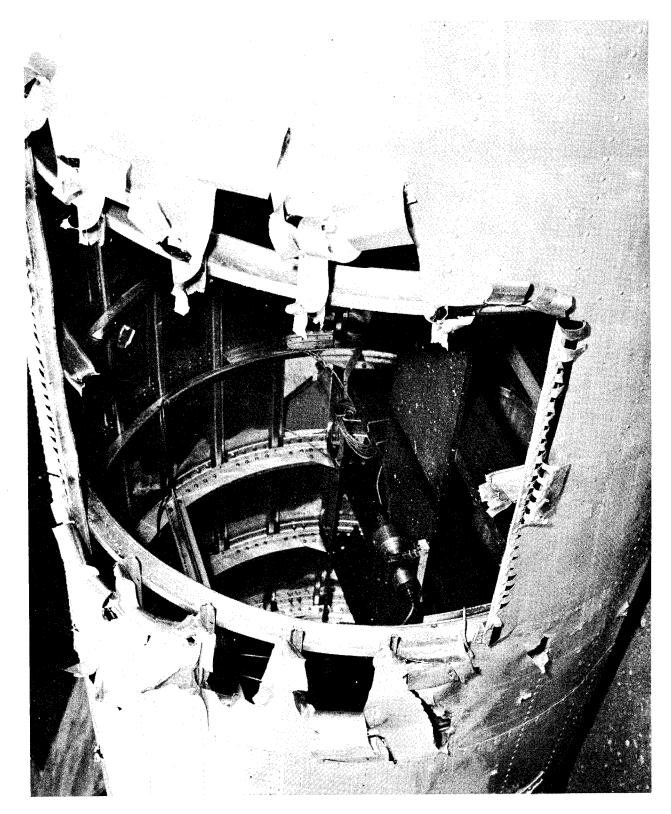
OUTSIDE VIEW OF THE MODEL AFTER TEST
